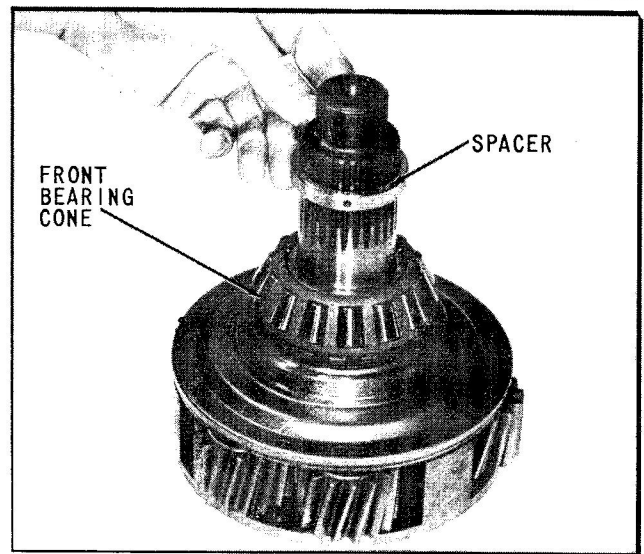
Install Bearing and Spacer (3 to 1 Ratio)
